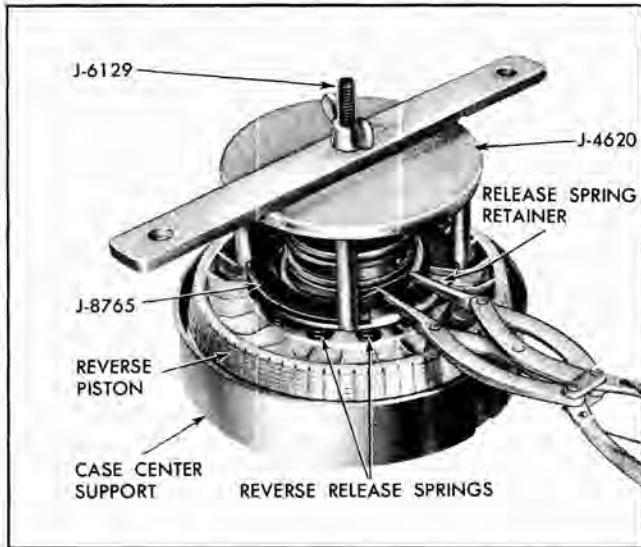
Removing Reverse Release Spring Retainer Snap Ring
